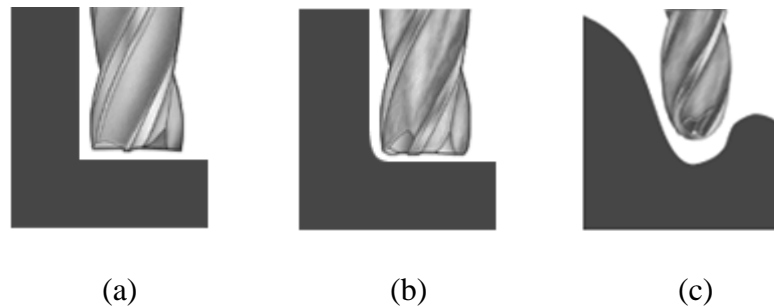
The implication of three type end mill toward the machined surface (a) Flat end mill (b) Bull nose end mill (c) Ball nose end mill
